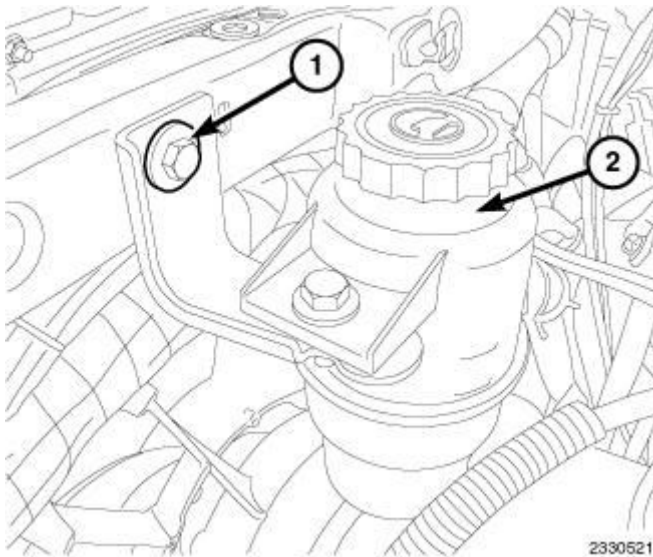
Power Steering Fluid Reservoir & Mounting Bolt
